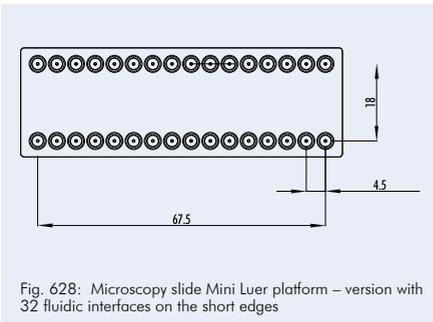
Microscopy slide Mini Luer platform – version with 32 fluidic interfaces on the short edges
